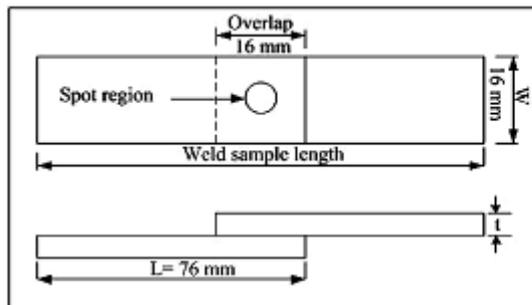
Overlapping of two welded Figure 4. The welded specimens plate [16].
